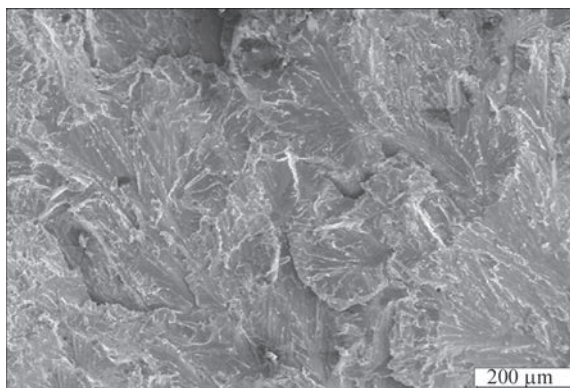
Fractogram of fracture surface of initial metal of titanium intermetallic of TiAl system, area of weld metal (×200)
